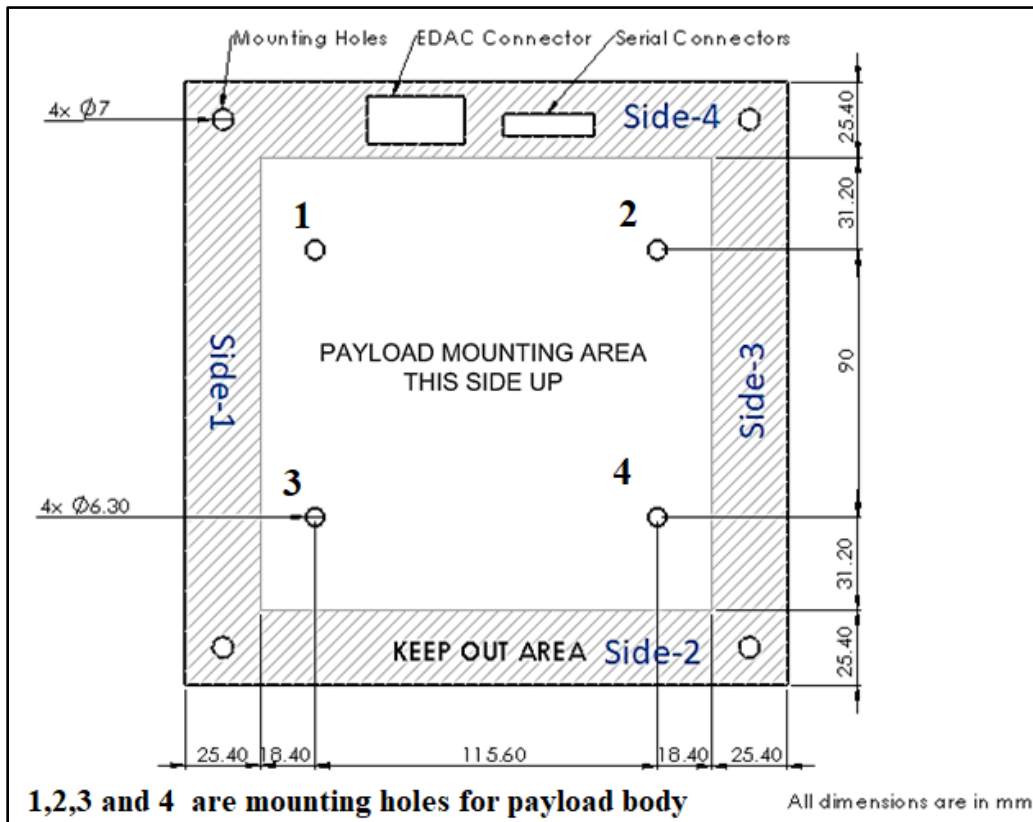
Mounting Plate for small payload (Courtesy: HASP Version 02.17.09 [9])
